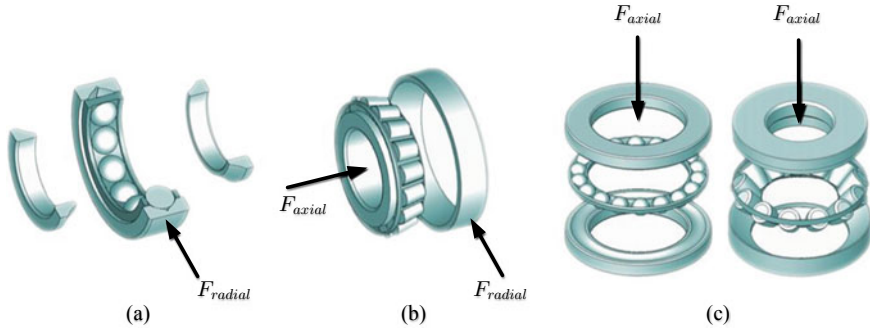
Types of rolling contact bearings: a ball, b tapered roller and c ball and spherical roller thrust bearings
